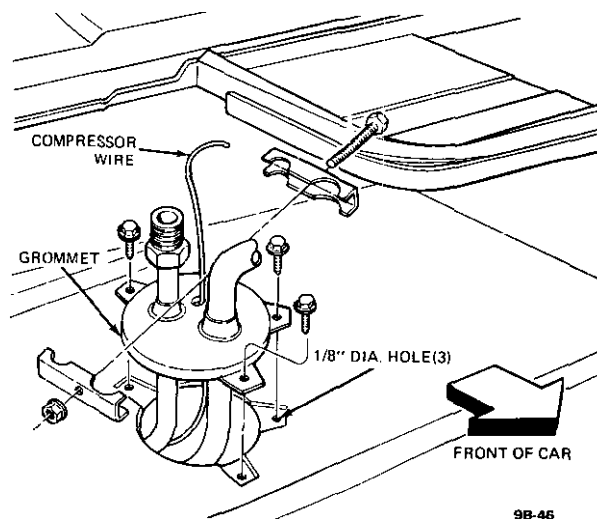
B-65 Inlet and Outlet Pipes retainer and Rubber Grommet-Opel 1900 • Manta
